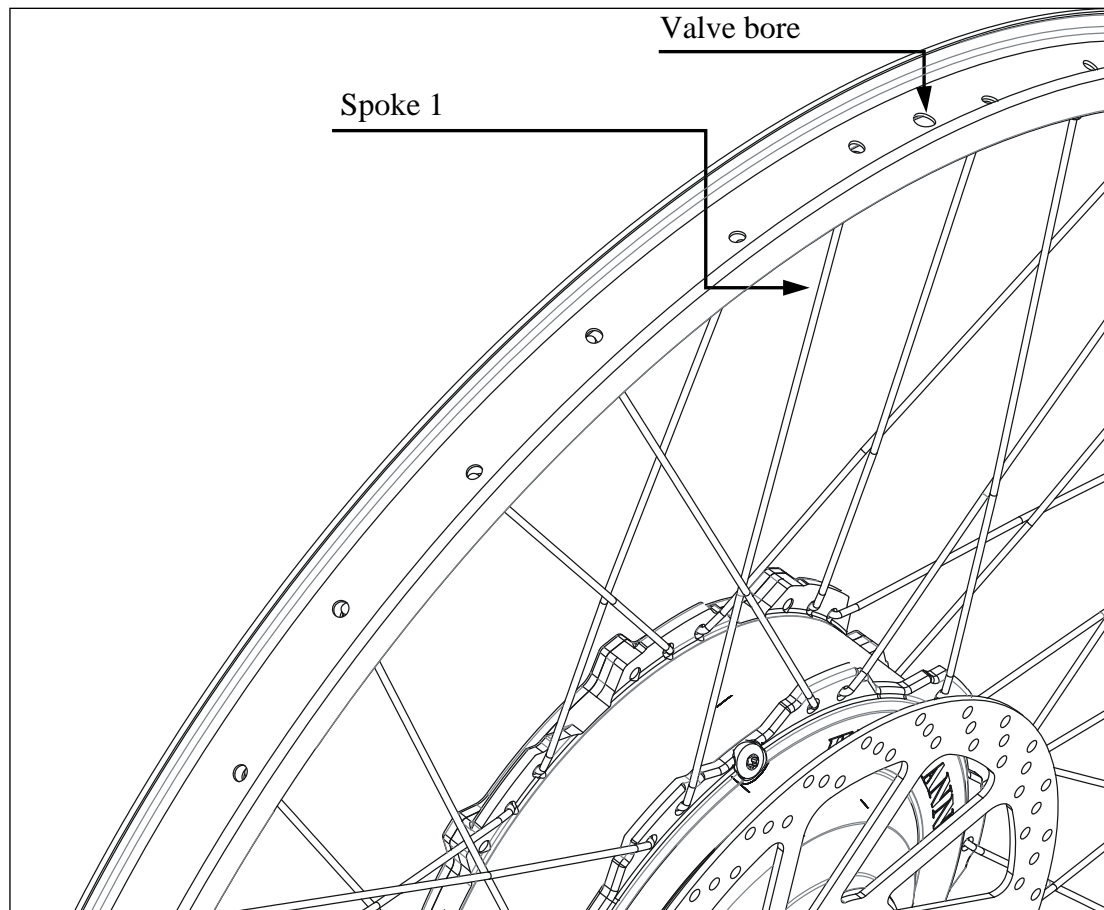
Spoke pattern rear wheel, rim 26" or rim 28", 1× crossed
